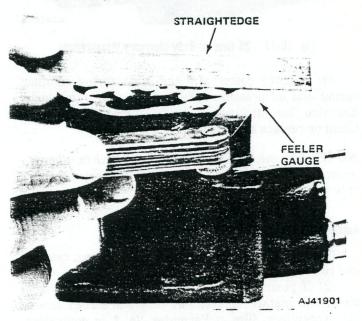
B-73 Oll Pump Gear End Clearance Measurement—Feeler Gauge Method
